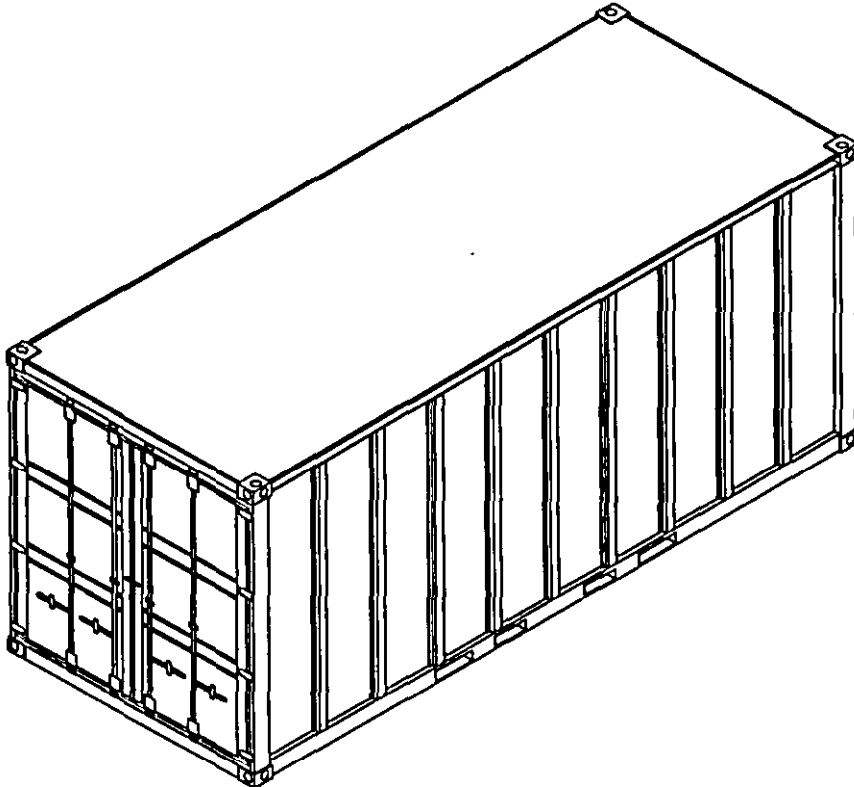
TYPICAL END-OPENING ALUMINUM CONTAINER
